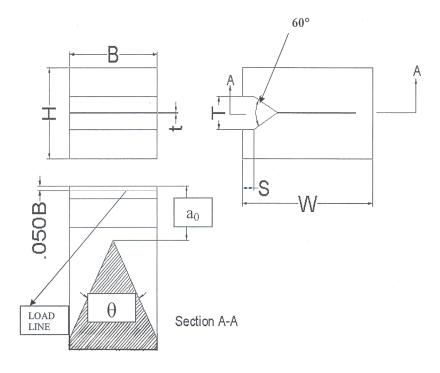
Schematic Drawing of Fracture Toughness Specimens with Edge and Internal Flaws
